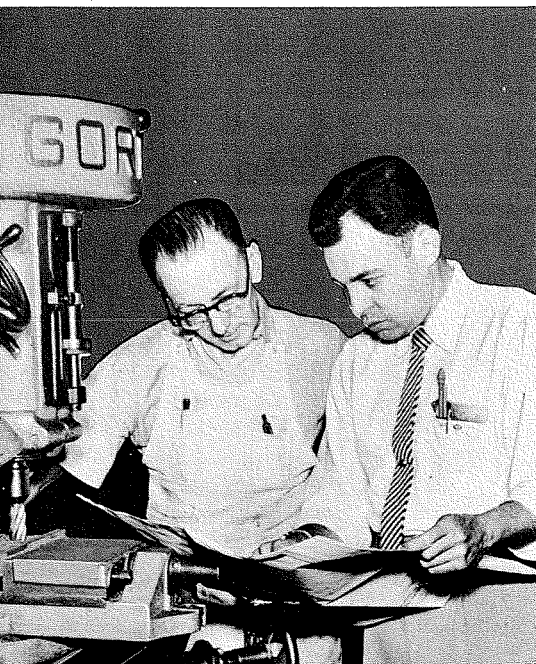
Equipment Development engineer D. Colasanto discussing a difficult machining problem with tool-and-die maker G. Grindley.
